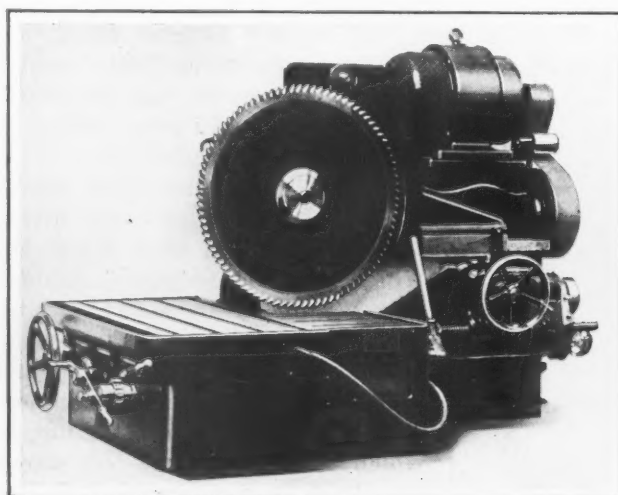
Special Type of Sawing Machine for Crankshafts and Similar Work
